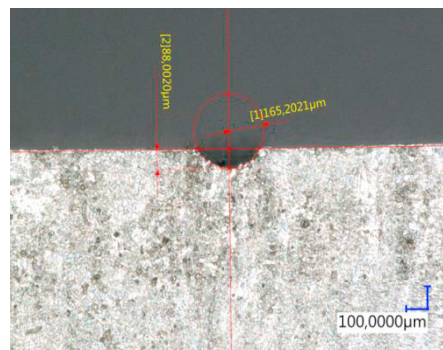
Measurement of the defect geometry introduced by EDM on the flange of CP800 grade specimen.
